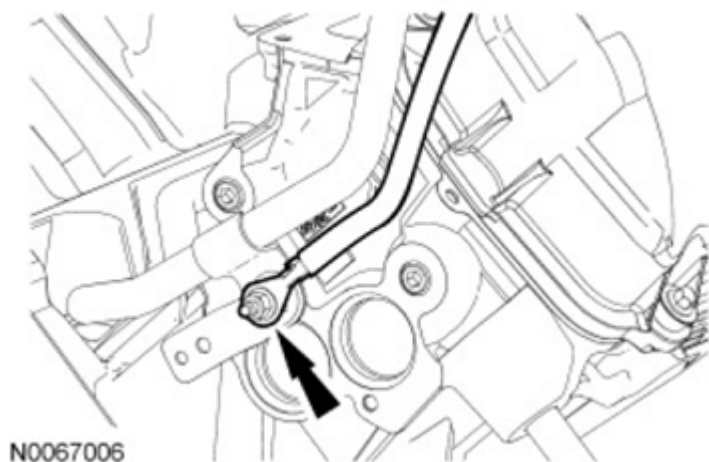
Locating Engine Wiring Harness Ground Straps And Nut
